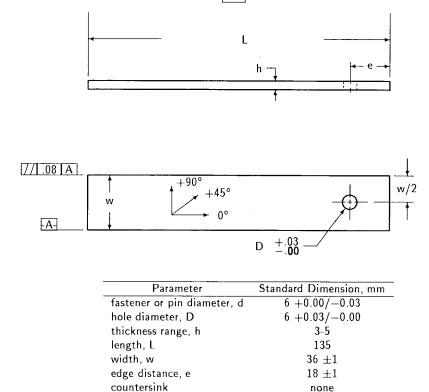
Double-Shear Test Specimen Drawing (SI)
